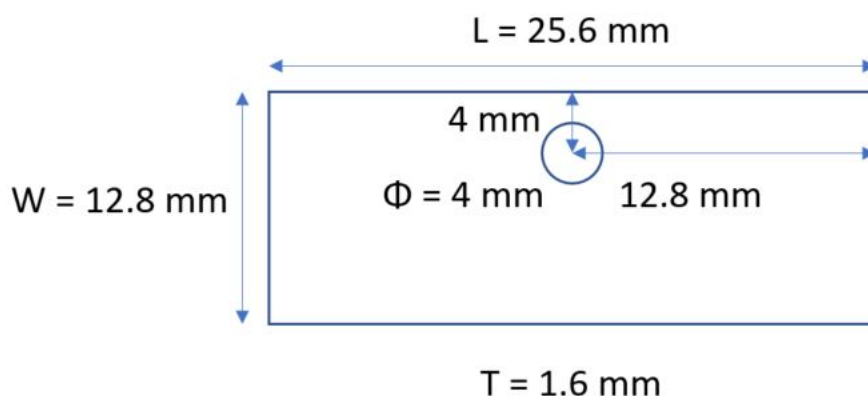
Schematic showing the dimensions of the machined Haynes 230 coupons
